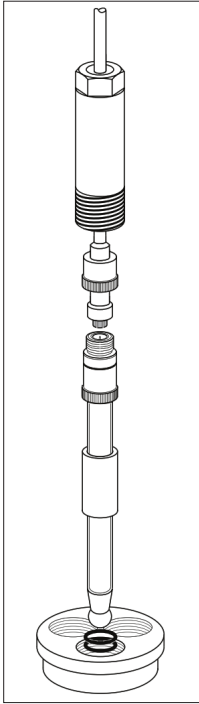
Standard mounting with mounting set FP20-R12, FP20-S12
